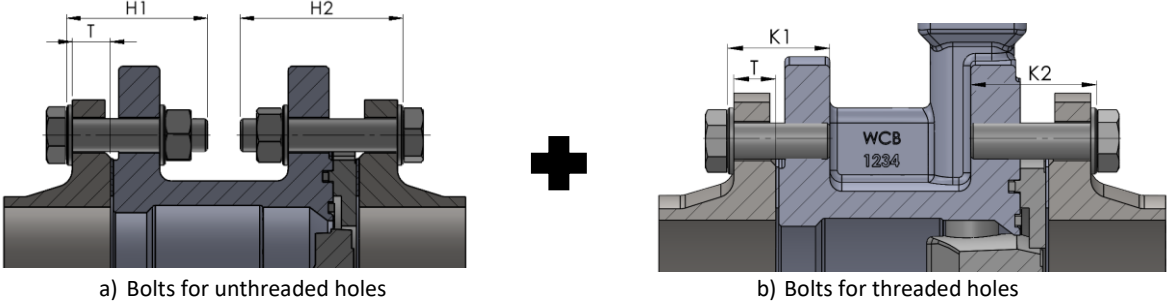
Dimensions of fasteners for valves with DF (Double Flange) type bodies
